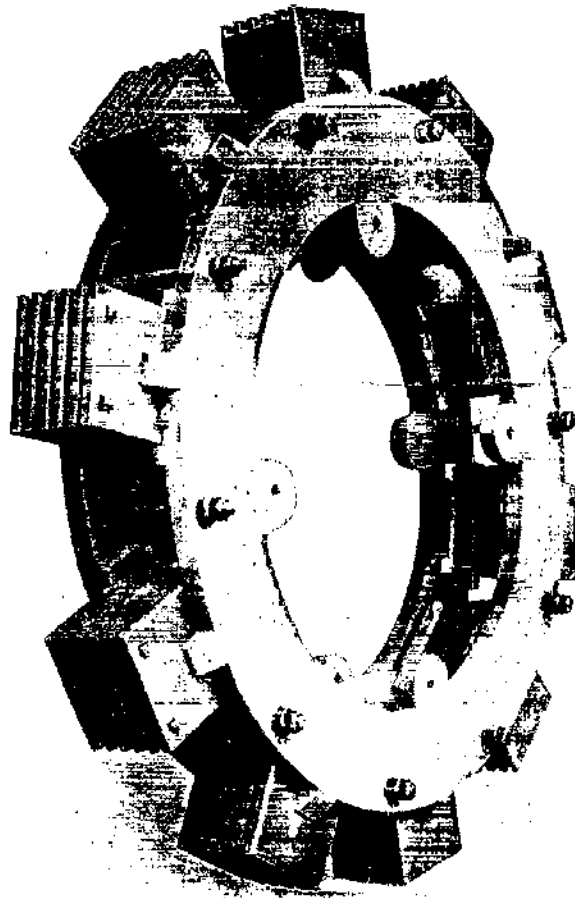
Pole-pieces Assembled in Clamp, ready for Moulding Process
